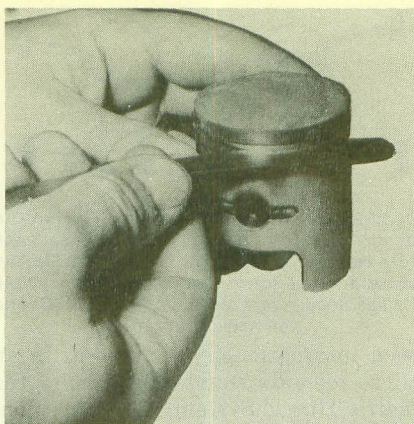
Ring side clearance in groove should be measured with gage as shown. Clearance should be within recommended limits and the same all the way around piston.
